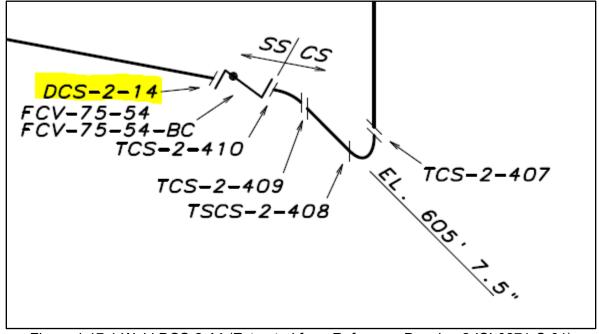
Weld DCS-2-14 (Extracted from Reference Drawing 2-ISI-0271-C-01)
